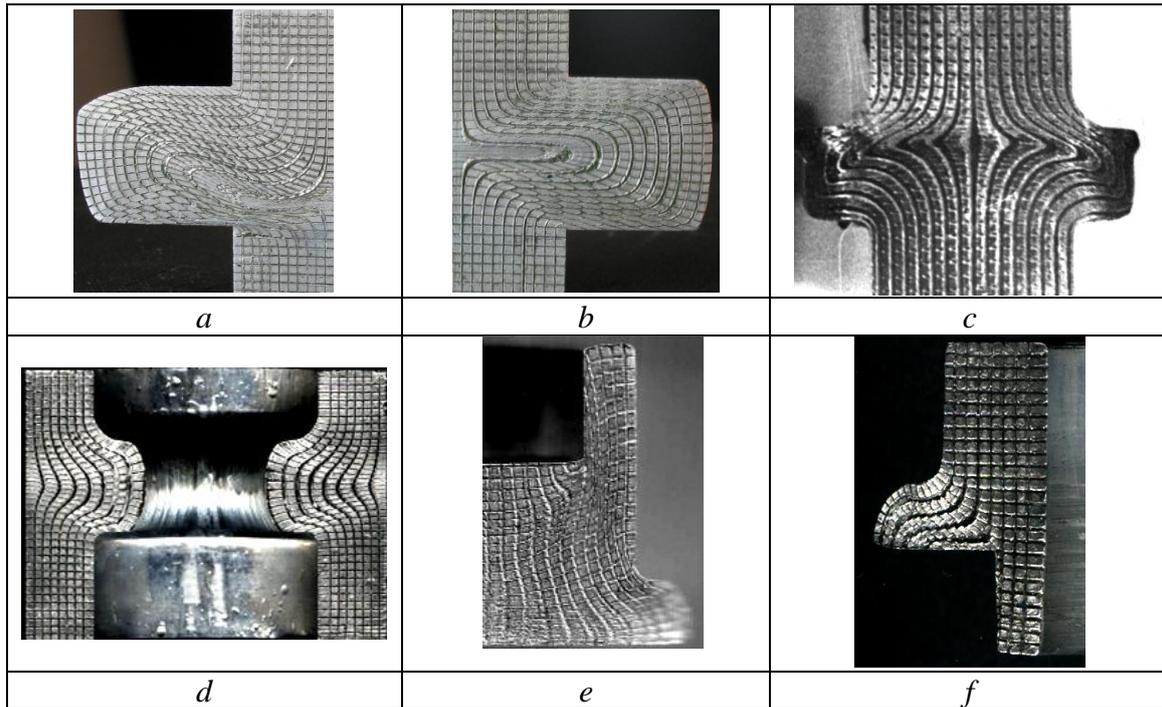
Parts with a dividing grid obtained by radial extrusion with one-sided (*a*, *d*), two-sided (*b*) and sequentially two-sided (*c*) supply, as well as combined radial-backward (*e*) and radial-forward (*f*) extrusion
